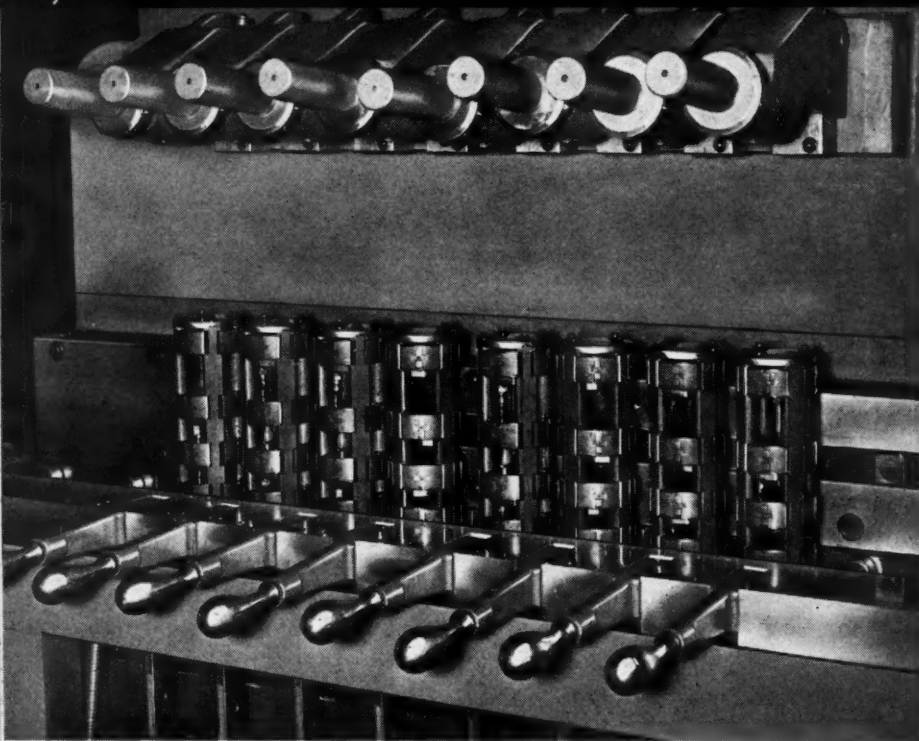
The Eight Spindle Assemblies, which Each Contain Four Spindles and Eight Air Orifices, are Shown in the Extended or Inspection Position. The Eight Handles at the Lower Front are Used to Turn the Spindle Assemblies through 180 Degrees for Out-of-roundness Inspection
